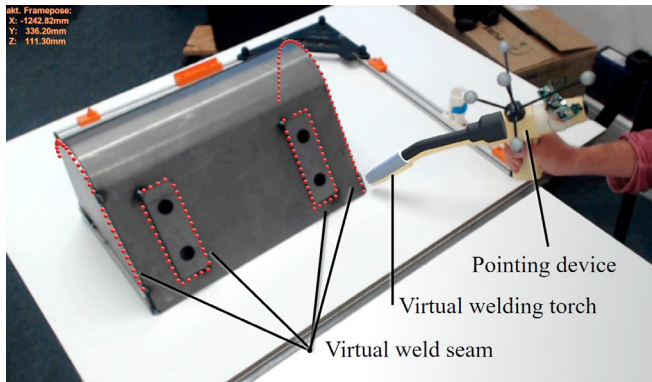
Workpiece with virtual weld seam (line of red spheres).
